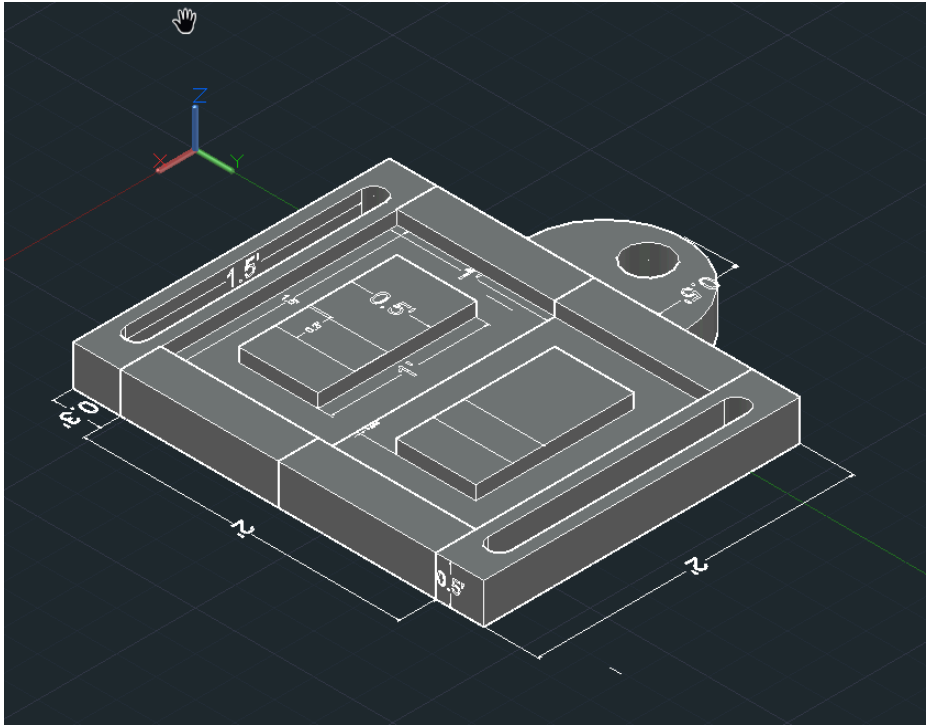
A 3-dimensional AutoCAD drawing of our hypothetical design excluding the additional components with appropriate dimensions in ft.
